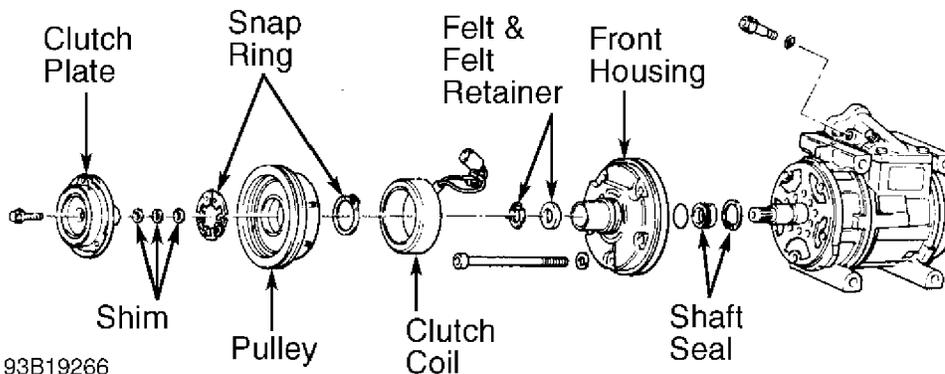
Exploded View Of Compressor (Nippondenso 10PA15 10-Cylinder)
